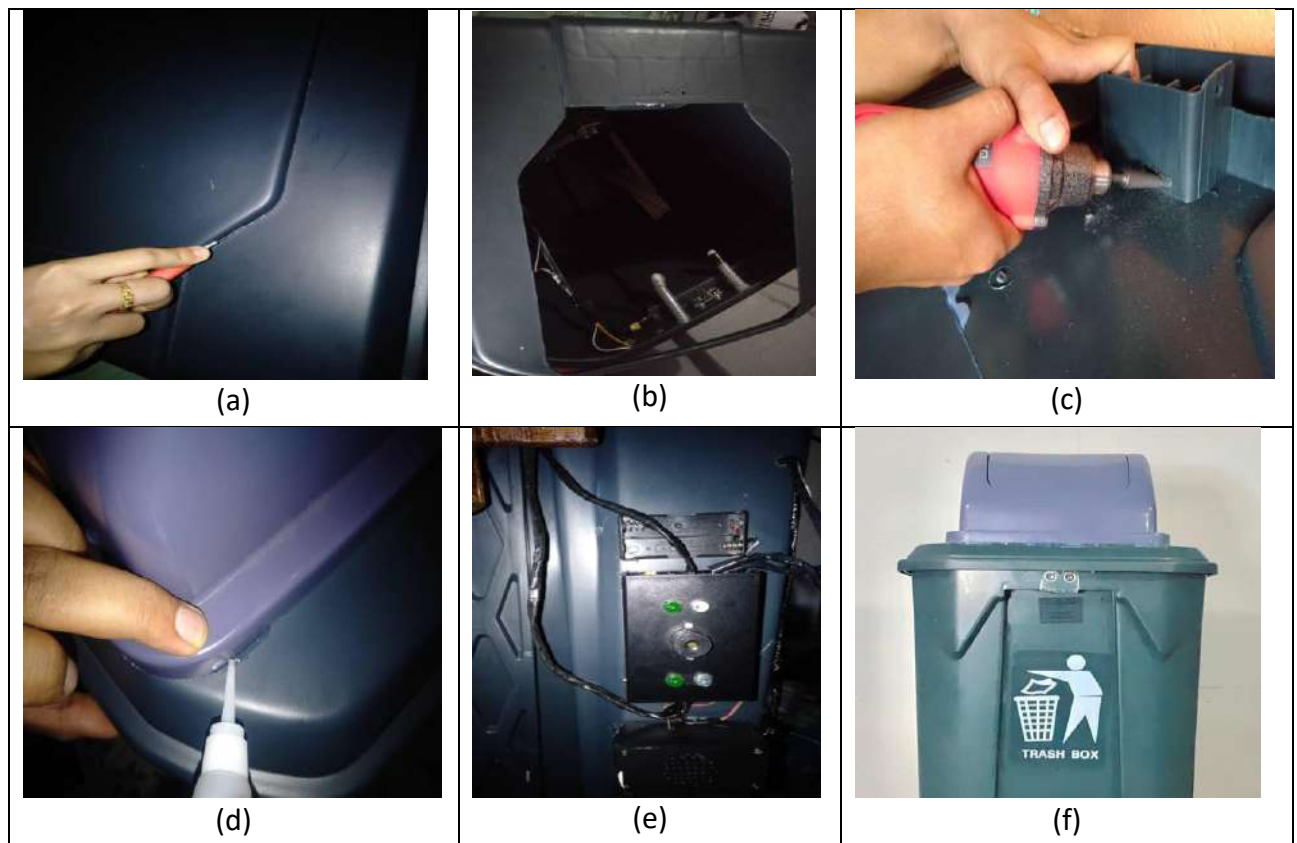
(a) Cutting the part of body trash bin using cutter acrylic. (b) Results after cutting for trash can cover. (c) Drilling holes for attach wire using hand drill gun. (d) Glue the new trash can cover (modify the can trash cover). (e) Attach wiring box at trash bin body. (f) Results after the glue and the new can trash cover.
